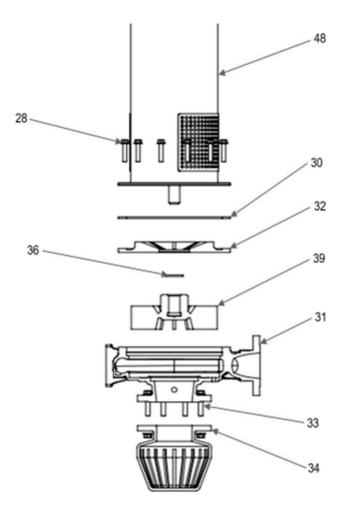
Impeller (39), Backliner (32), Housing (31), Suction Sieve (34)
